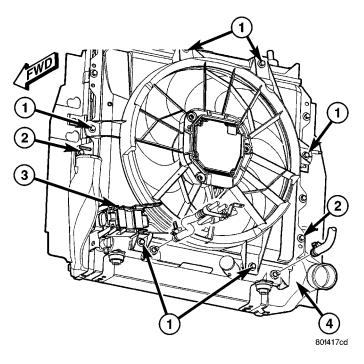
Fan Mounting To Cooling Module - 2.4L Turbo
